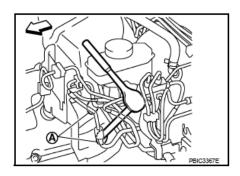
View Of Removing Expansion Bar Courtesy of NISSAN MOTOR CO., U.S.A.
